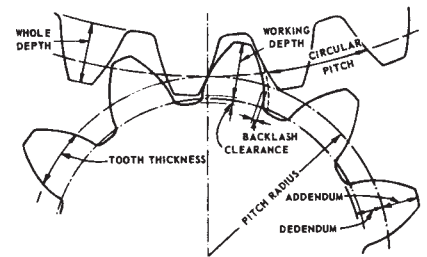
SPUR, HELICAL, GEAR NOMENCLATURE
